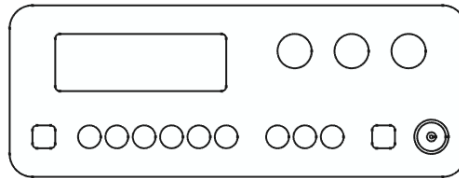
Front view of Body(Produced using FreeCADweb)
